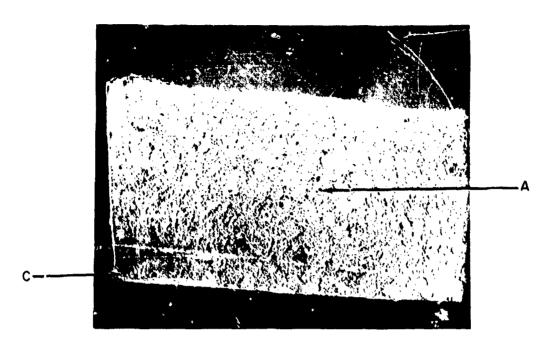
Tensile fracture surface of hydrogen-embrittled A-36 steel, 10x.
